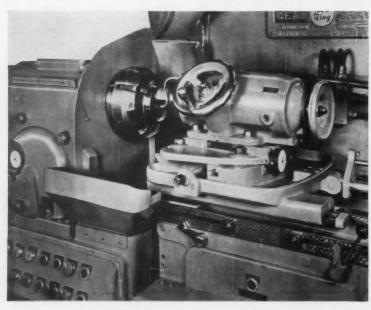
Internal gear-shaving machine set-up for crowning operation
